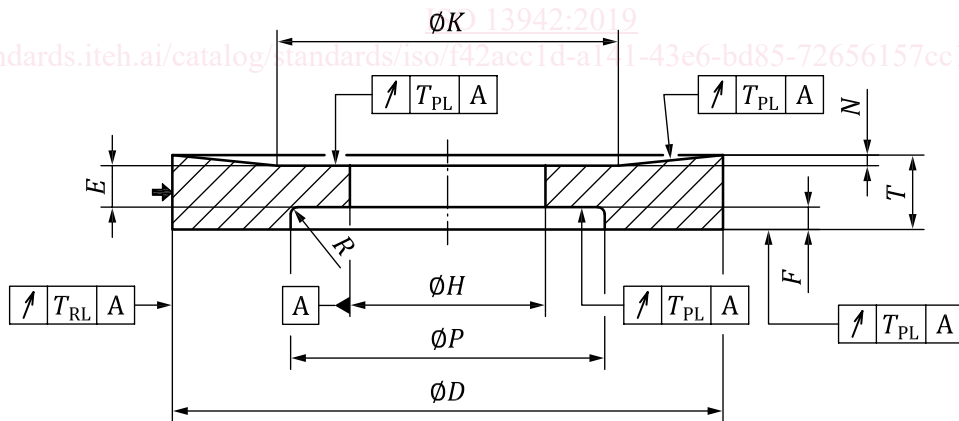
Grinding wheel, relieved on one side, recessed on the other side (Type 22)
